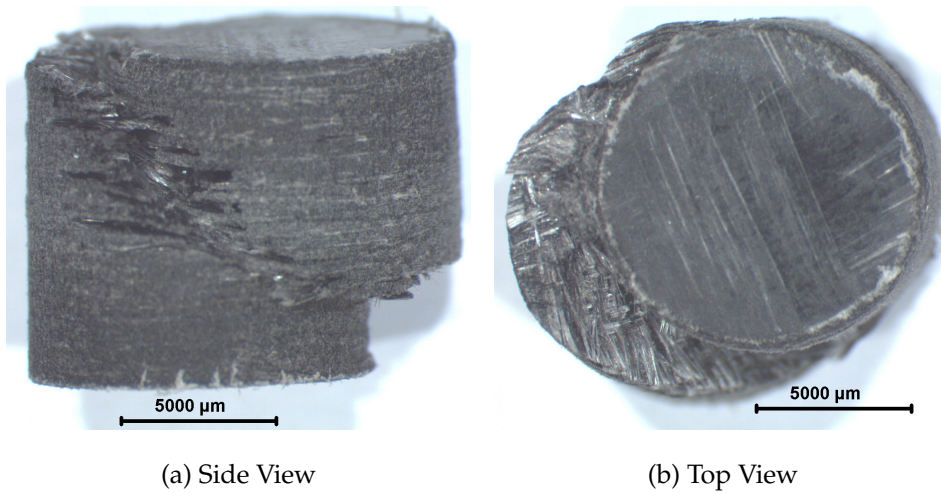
CHS 10 mm/min , Specimen 1: Macroscopic shear
